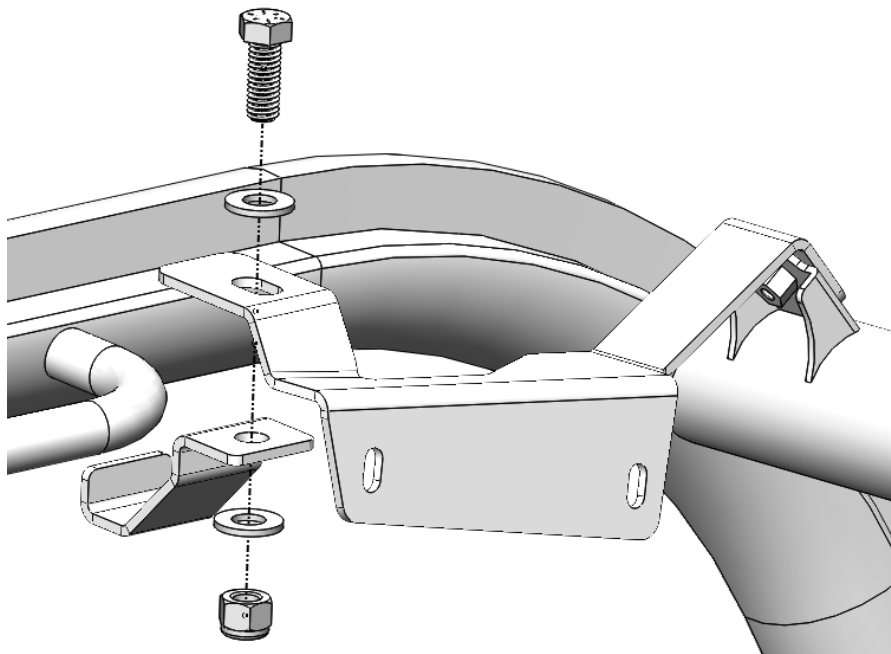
Mount the clamping bracket to the frame. Driver side shown. (Passenger side similar)
